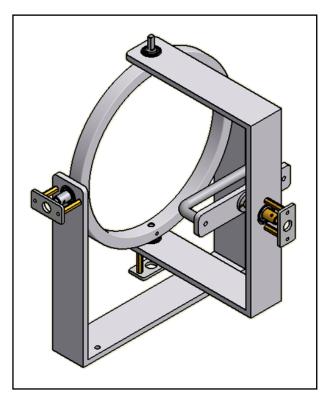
BACK ISOMETRIC VIEW OF THE PROTOTYPE 3D MODEL.
